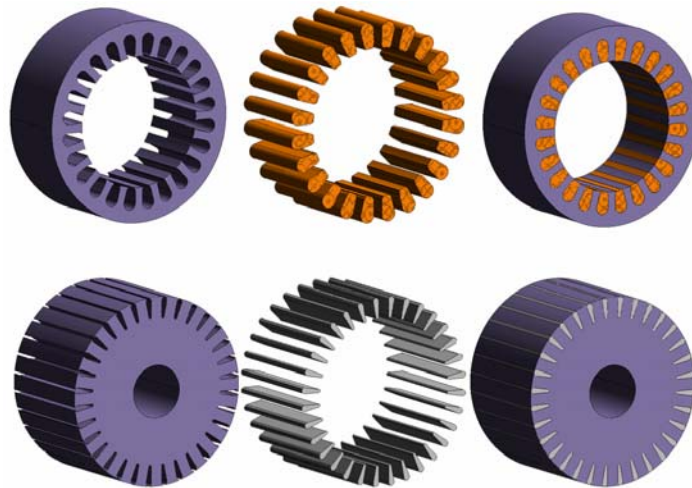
Detailed motor model implemented in MagNet:(first line) stator core; stator winding; full stator;(second line) rotor core; rotor winding; full rotor.
